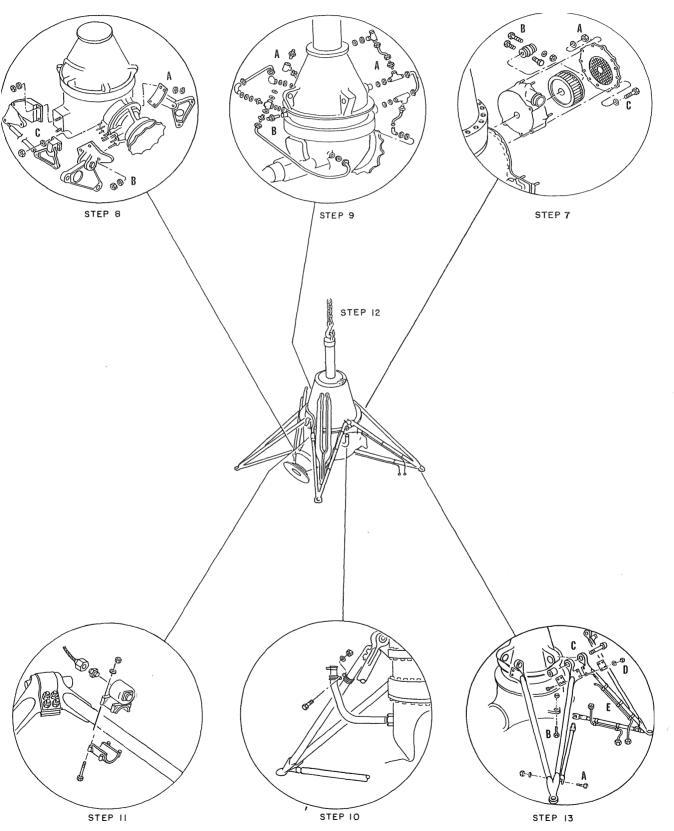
Main Gear Box and Rotor Quick Change Unit Disassembly (Sheet 2 of 2)
